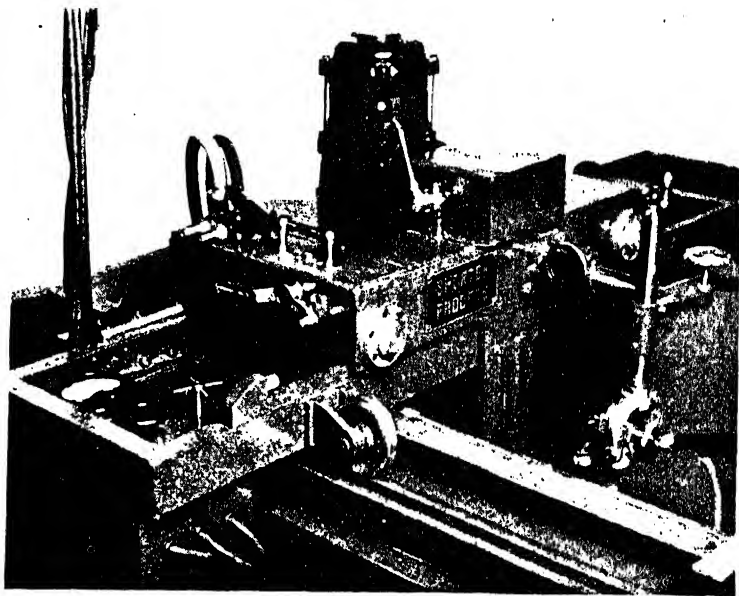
The carriage of the Shorter machine shown above. By means of a secondary mechanism worm-gears and other cylindrical parts may be treated
